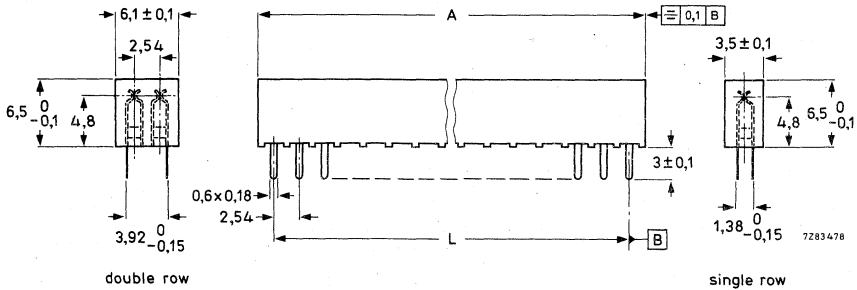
Bottom-entry socket. See Table 1 for dimensions A and L.
